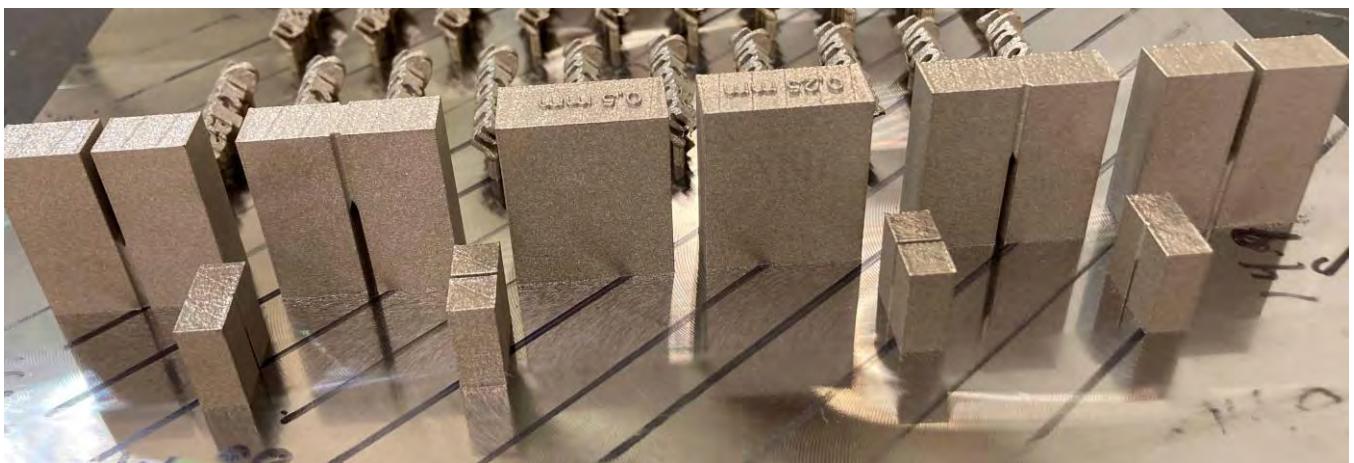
CGR/crack initiation compact tension specimens printed using the Renishaw AM400 LPBF system.
